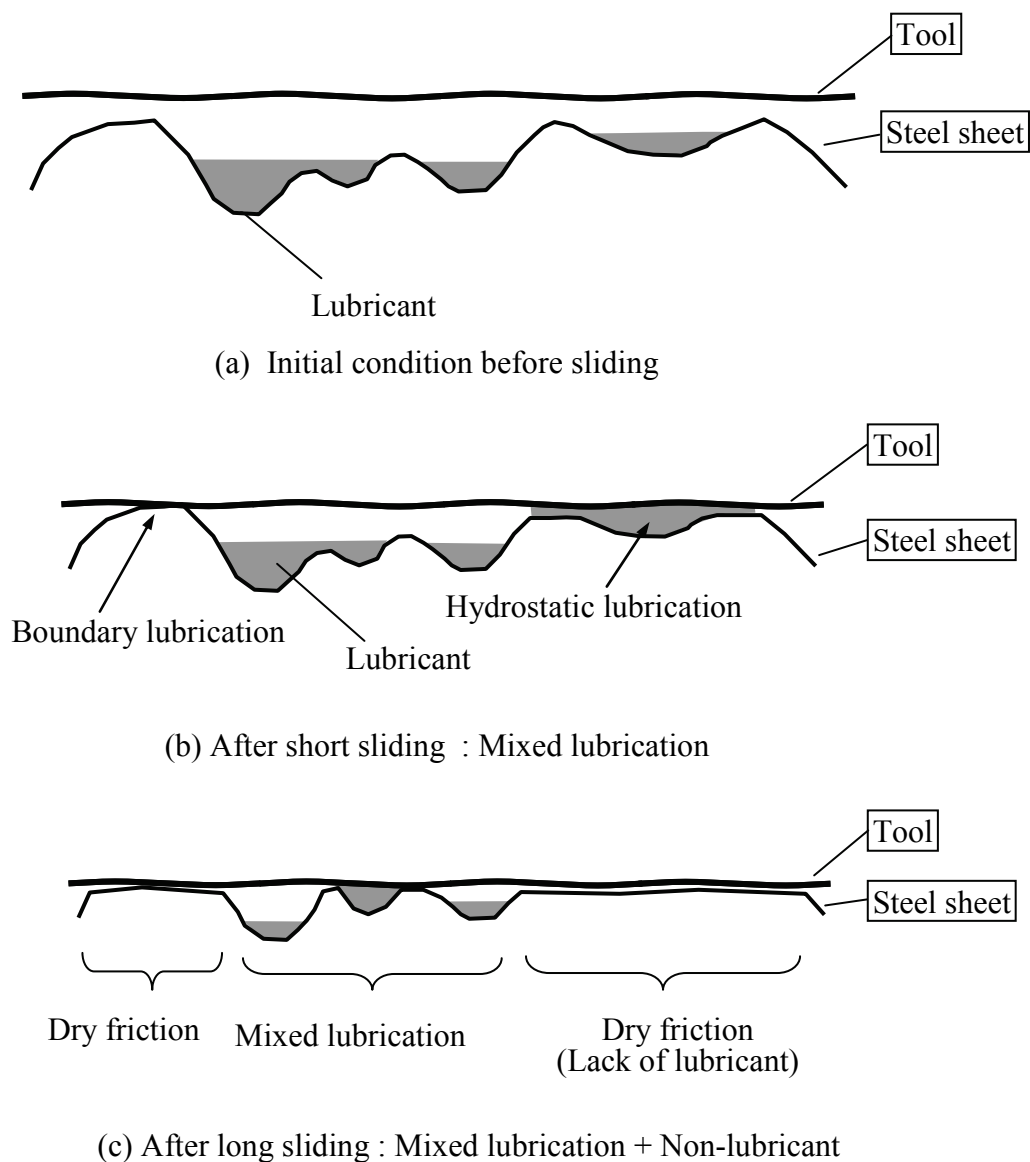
The condition of lubrication between the tool and the steel sheet in the friction tests II
